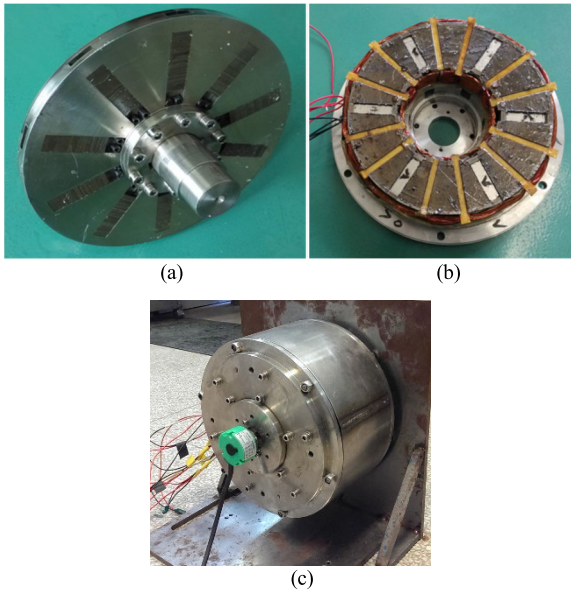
Pictures of a 6/10 E-core DSAFFSPM machine. (a) 10-pole rotor. (b) Stator with 6 E-core modules. (c) Prototype machine.
